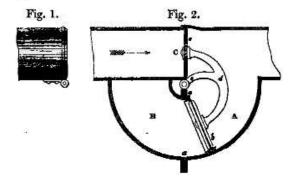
is the *exit* separating valve, or that, at the end of the section nearest to its steam engine; this valve is opened by the compression of air caused by the piston after it has passed the branch which communicates with the air-pump.
